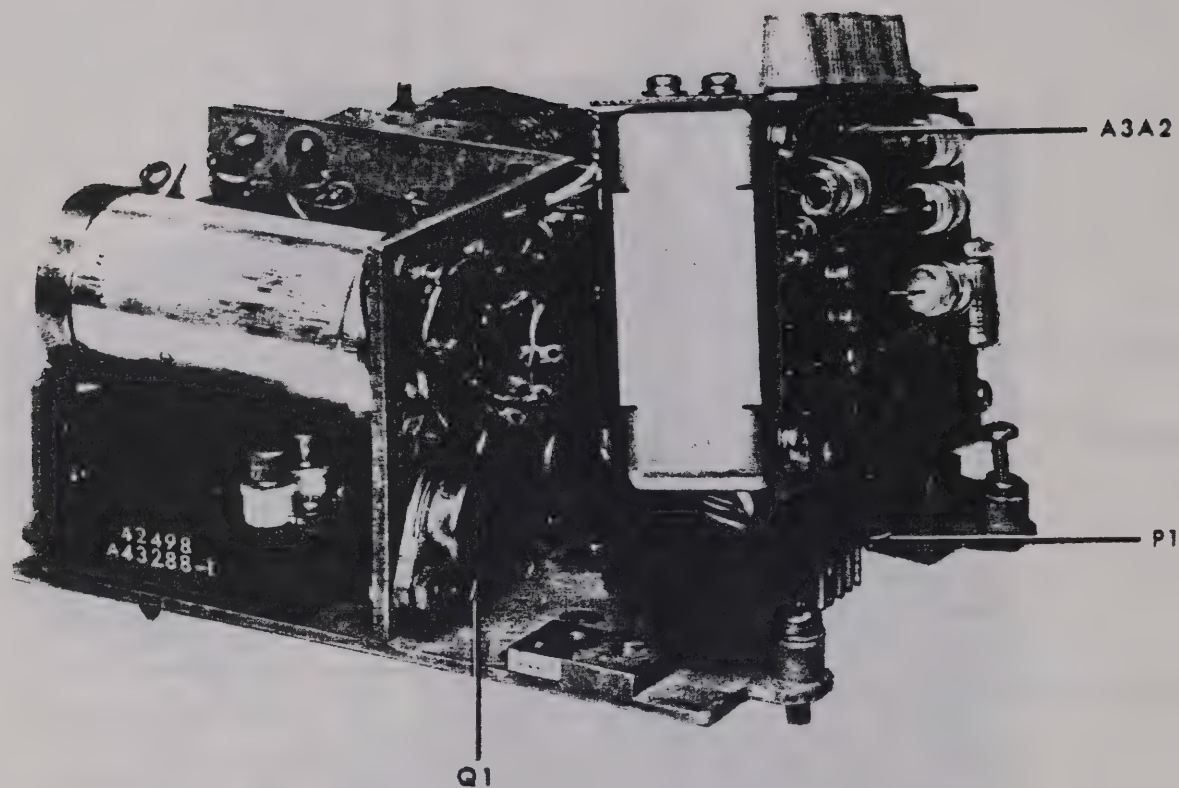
Power Supply A1A3PS1, Parts Location (Sheet 1)
